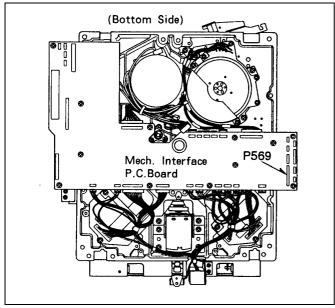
Pinch Solenoid Connector (P569) Removal
